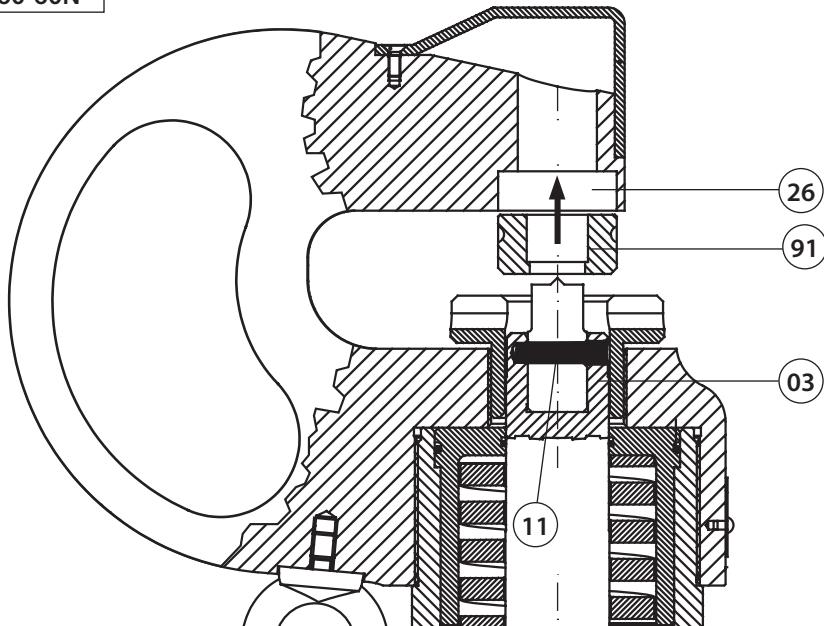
DIE ASSEMBLY MONTAGE DE LA MATRICE EINBAU DER MATRIZE
